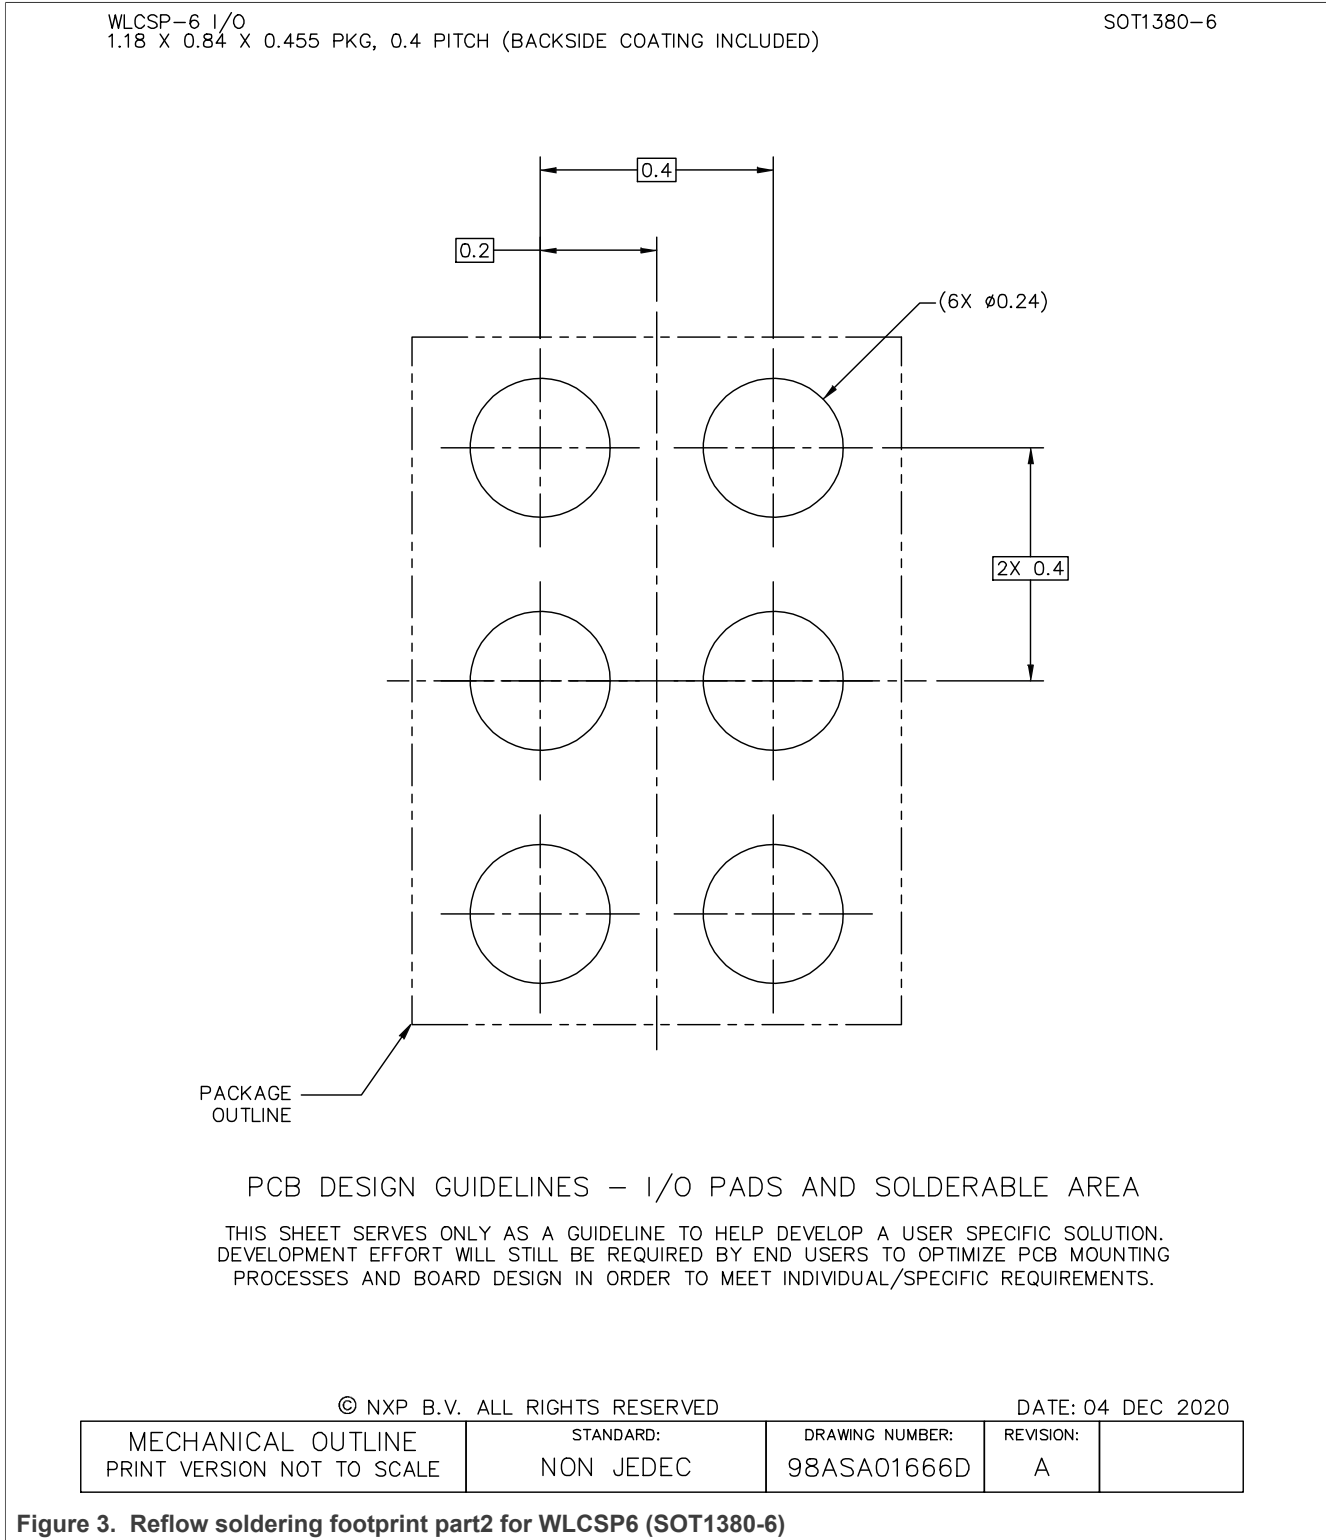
Reflow soldering footprint part2 for WLCSP6 (SOT1380-6)
